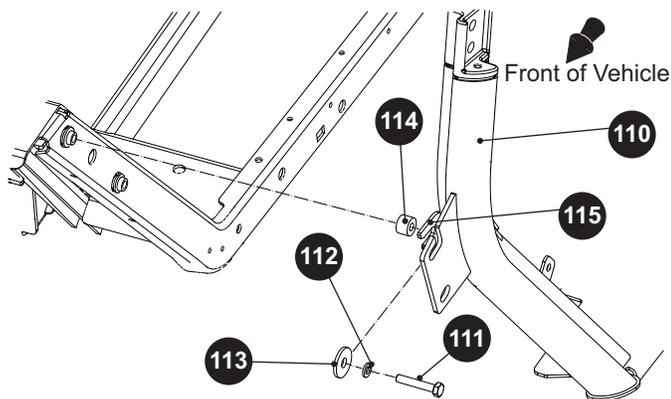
Lower OPS Weldment (Upper Fastening)
